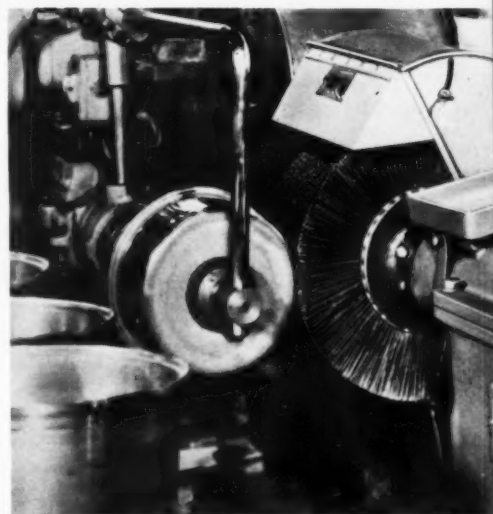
Polishing stainless steel utensils to a high finish with cord brushes.
